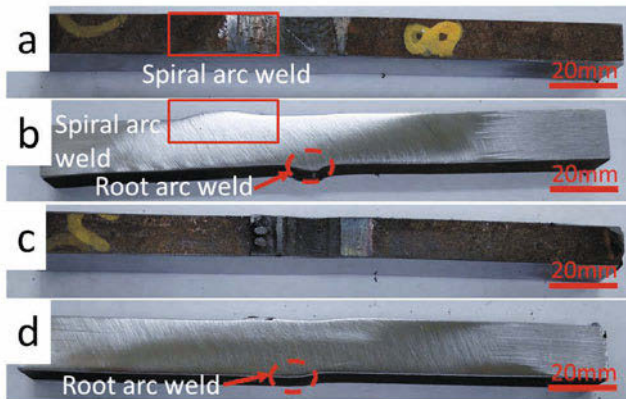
(a) Top view image of a transverse tensile specimen cut at the left side of the welded line pipe steel plate with the spiral arc welding shown (red color box). (b) Cross section view of Figure 3a showing the spiral arc weld. (c) Top view image of the tensile specimen cut at the right side. (d) Cross section view of tensile specimen, already shown in Figure 3c, showing unevenness or misaligned two pipes. Note that the root arc weld is marked by a red dot circle.
